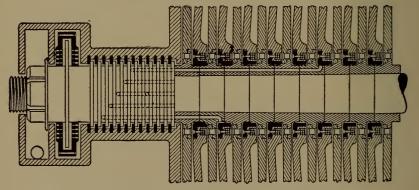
Grooved Steam Passages and Labyrinth Packing of Wilkinson Turbine
